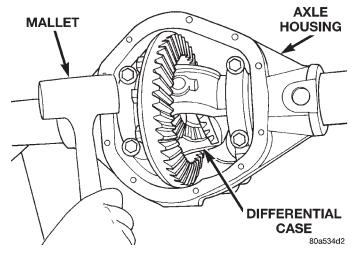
Seat Pinion Gear Dummy Side Bearing
